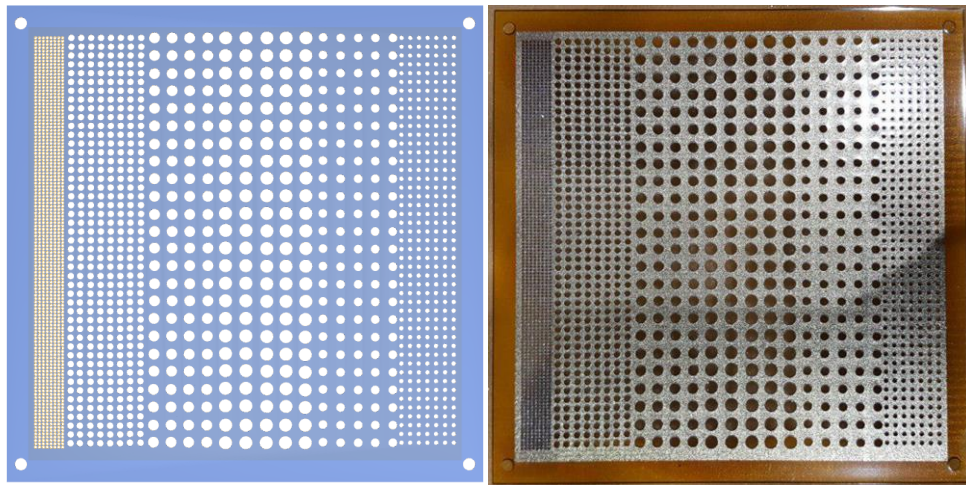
(Left) 3D Altium Designer view of board model; (right) printed version
